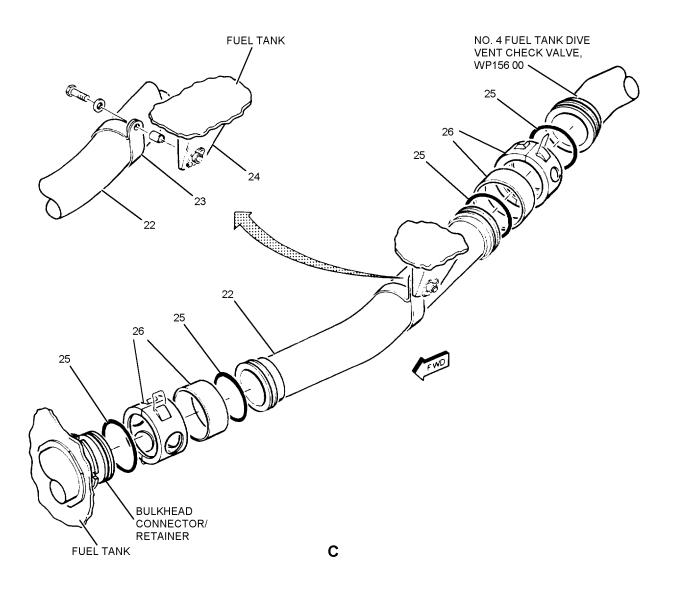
Fuel Dump Valve (5B-P069) (Sheet 4)
